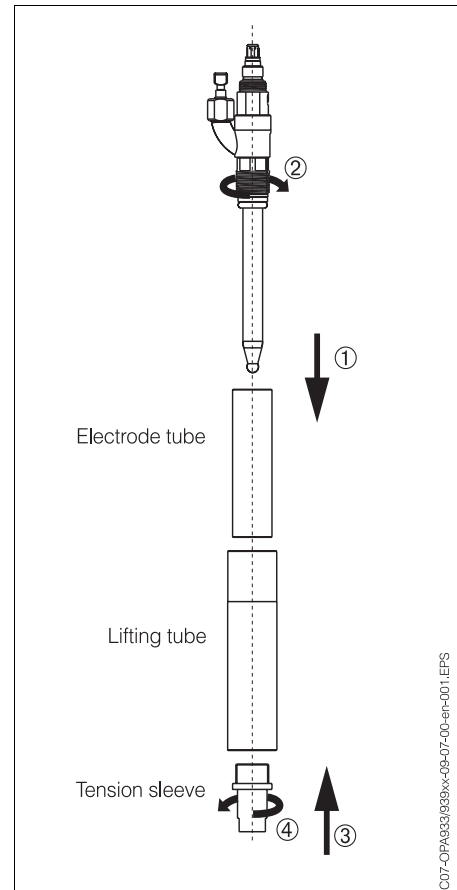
Installing the liquid KCl electrode in the lifting tube
